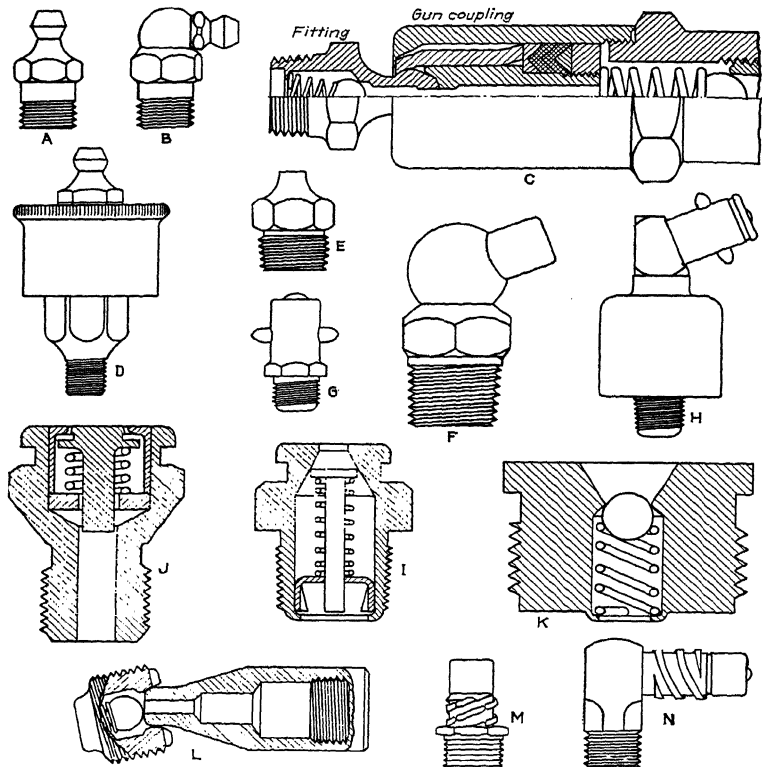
Typical grease-gun fittings. A and B, straight and 90-deg. hydraulic fittings; C, cutaway view of hydraulic fittings and gun coupling, showing how coupling grips the fitting; D, straight grease-cup fitting for filling cup from gun; E and F, fittings for application of push-type grease gun; G and H, fittings for screw-plunger gun with bayonet-type coupling; I and J, buttonhead grease-gun fittings; K, flush fitting, used where space is limited; L, grease-gun nozzle applied to flush fitting; M and N, standard dot-type grease-gun fittings for heavy machinery.
